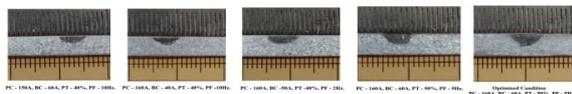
Macro structure for PCTIG welded samples (condition 6 to 9 and optimized condition)
